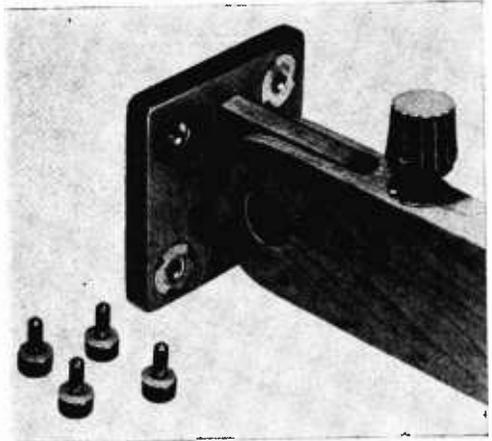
Use of knurled-head bolts or thumb screws facilitates the removal of the transmitter board for storage, and to solve certain locating problems.
